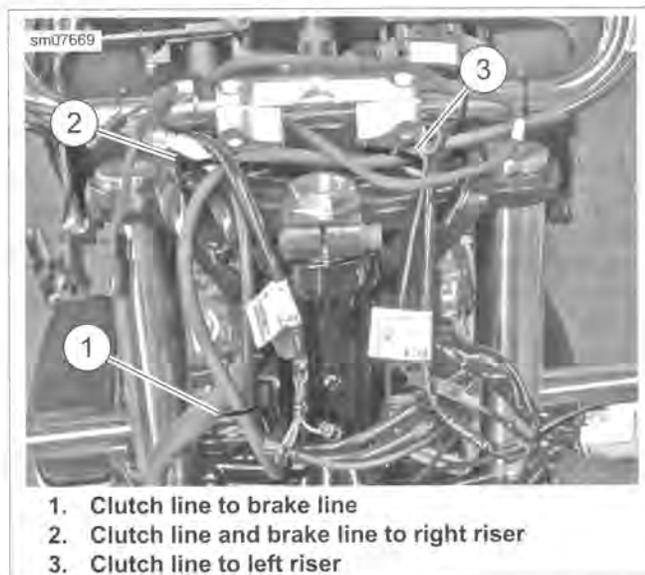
Capture Clutch and Brake Fluid Lines (Fairing Models) (Fairing removed for photo clarity)
